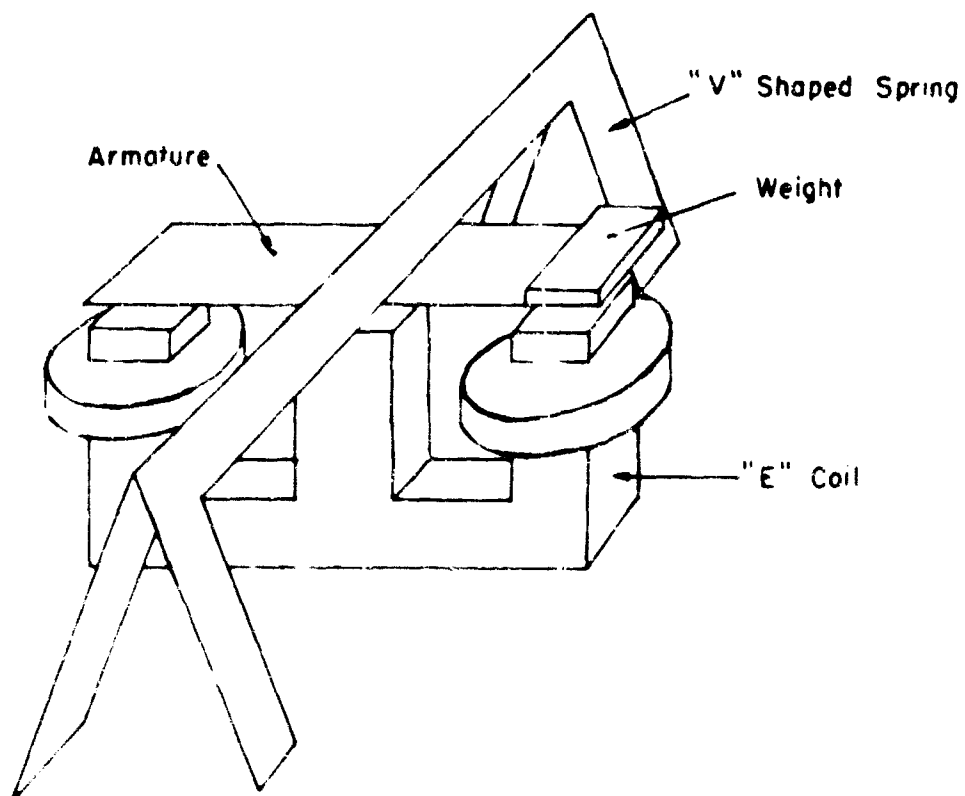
24—Schematic drawing of accelerometer spring mechanism
